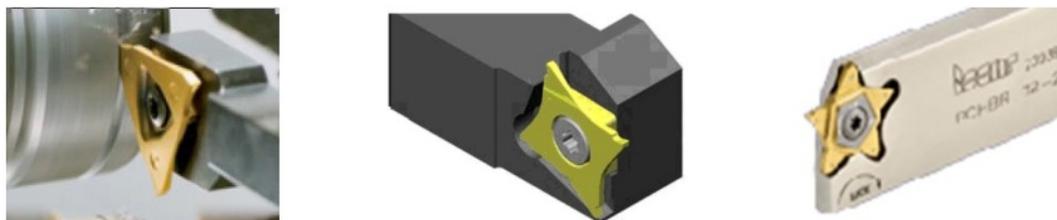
Groove cutters with lateral mounting of multifaceted plates
